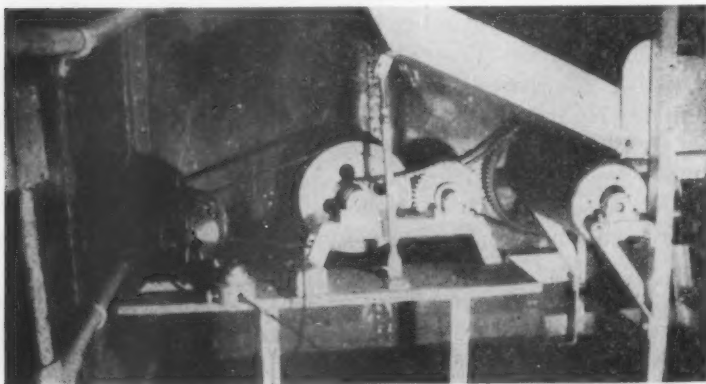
SPEED REDUCTION DRIVE FOR RETURN BELT.
